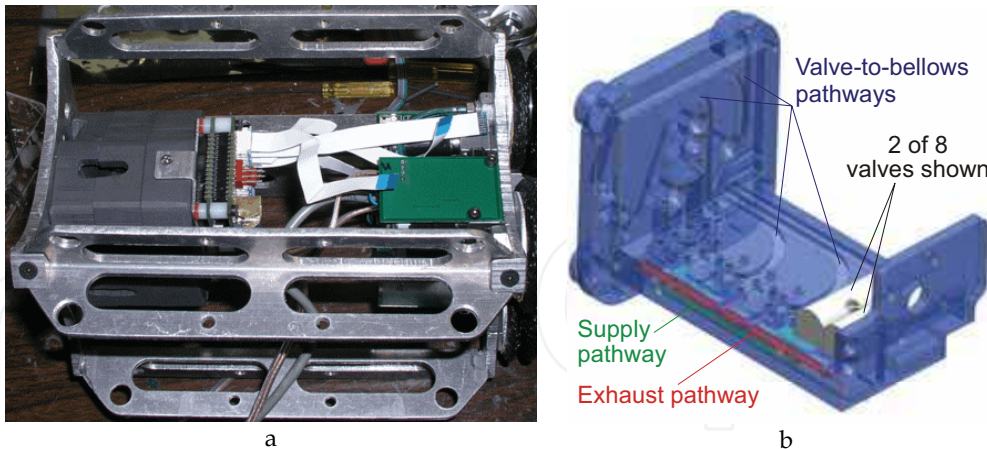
a - Aluminum frame of the OT-8 with gearbox, controller boards and manifolds with white flat cables visible inside, b - Manifold of the of OT-4 with two of the eight valves (white) mounted. Exhaust and supply pathways from and to the bellows are shown in red and green, respectively. This manifold is also partially the chassis of the six OT-4 actuation segments.
